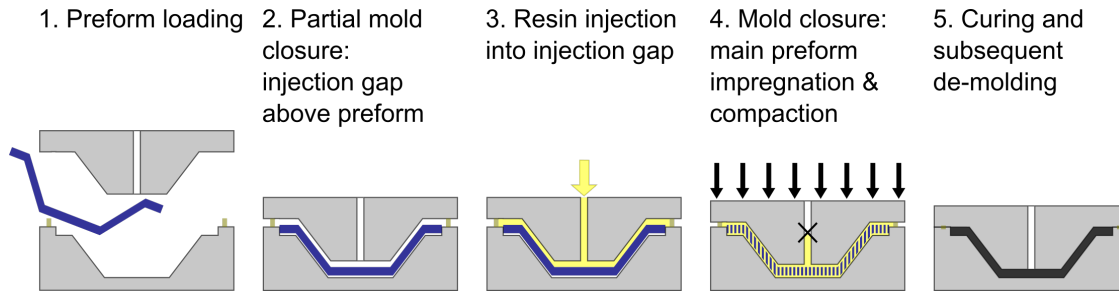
Schematic illustrating the principal steps of the compression resin transfer molding process at which an empty space (injection gap) is formed between upper mold and preform prior to resin injection, denoted CRTM-2.
